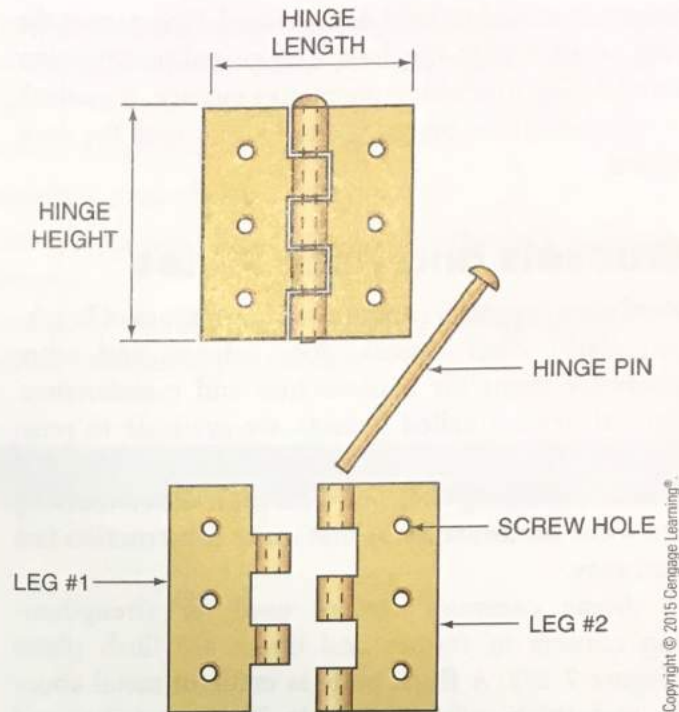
A hinge consists of three parts: two legs and a pin. The hinge pin interlocks leg 1 with leg 2. Hinges with removable pins may be purchased for use on doors intended for occasional removal. Many hinge pins, however, are not removable.
